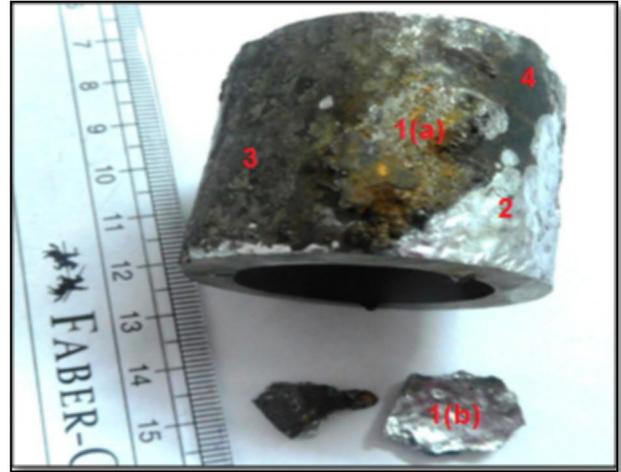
Cut Sample piece of the Outlet Pigtail Tube (1(a) &(b)- Adherent Oxide Layer; 2-Chipped Surface; 3-Greyish Tube surface; 4- Greyish-black oxide layer)
